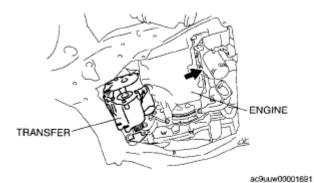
Identifying Front Side Of Transfer Faces Courtesy of MAZDA MOTORS CORP.
